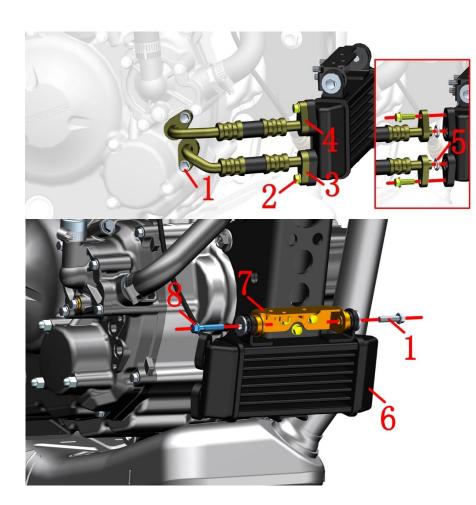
Co	OOLING SYSTEM	Oil cooler component 1	CHK	(0)
